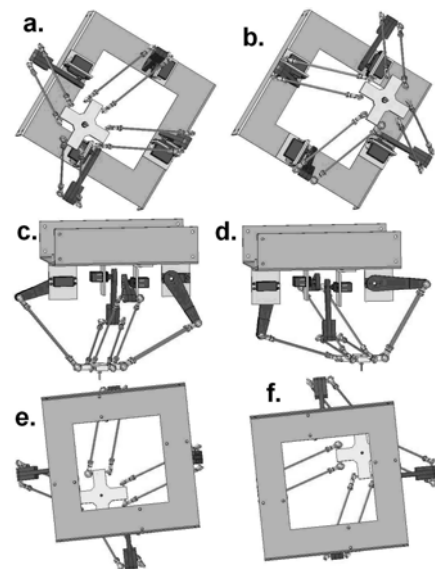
Simulation of laser tool head movement: a and b Bottom views, c and d Side views, e and f Top views
